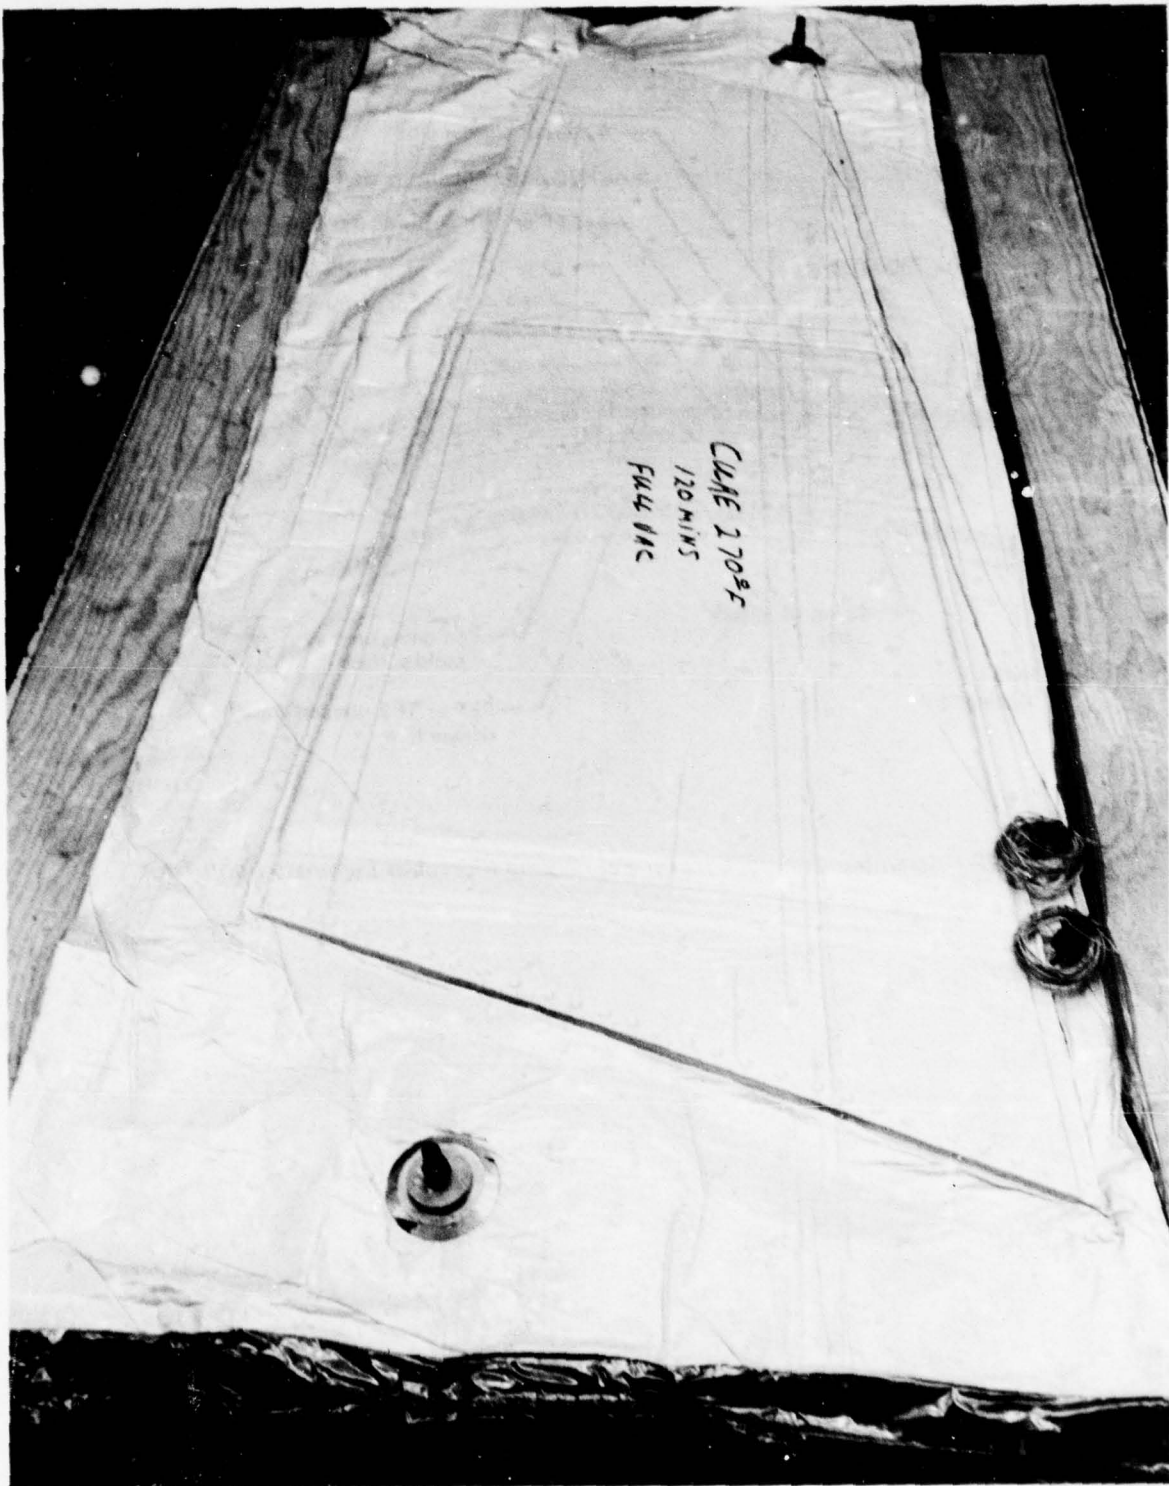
Assembly Ready for Cure of Bonding Tool
